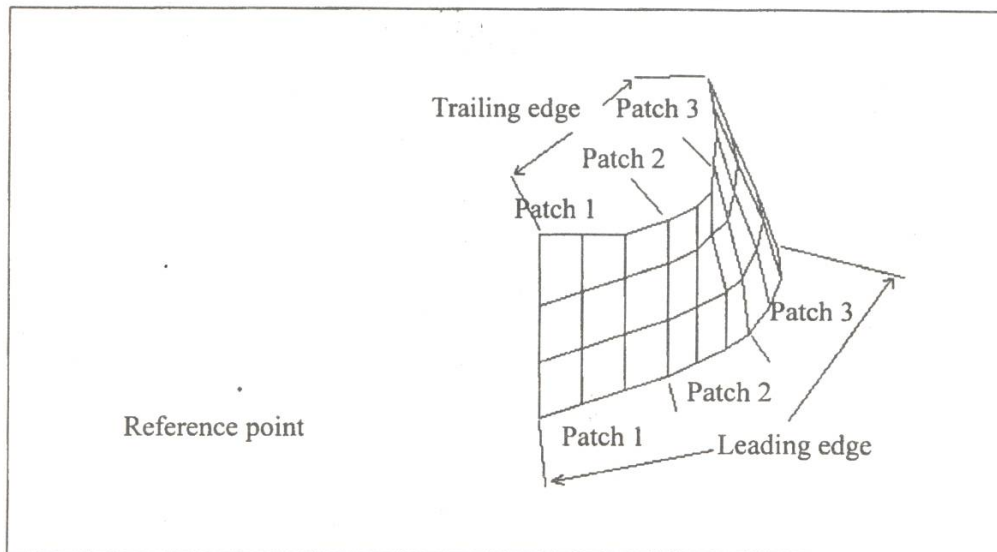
(b) Working surface of the C-type blade developed using VS method
